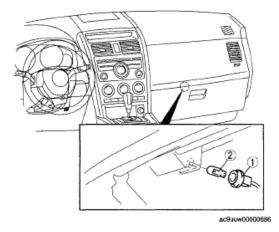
Socket Removal Courtesy of MAZDA MOTORS CORP.
